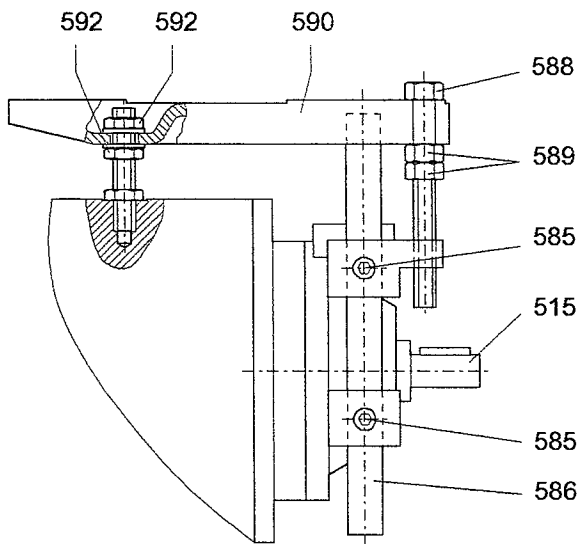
Mounting motor bedplate IEC motors from size 225
